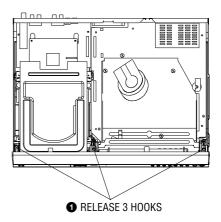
Ass'y Front Panel Removal (Top View)
